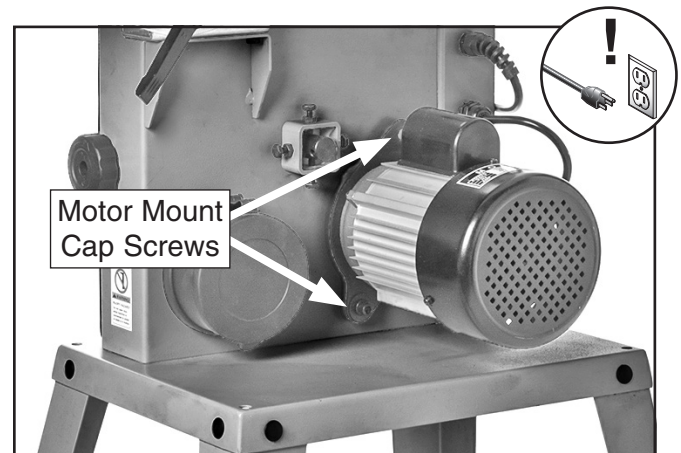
Location of motor mount cap screws used for adjusting belt tension.
